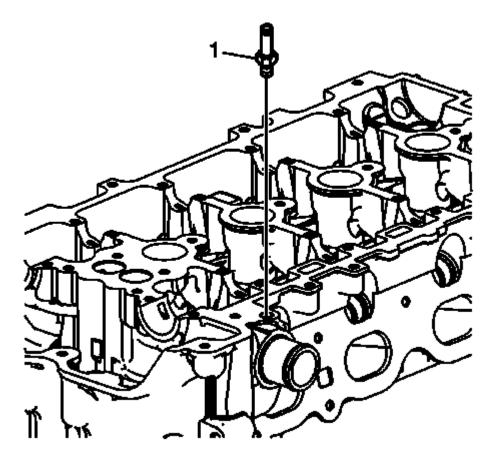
Coolant Air Bleed Hose Fitting Courtesy of GENERAL MOTORS COMPANY
